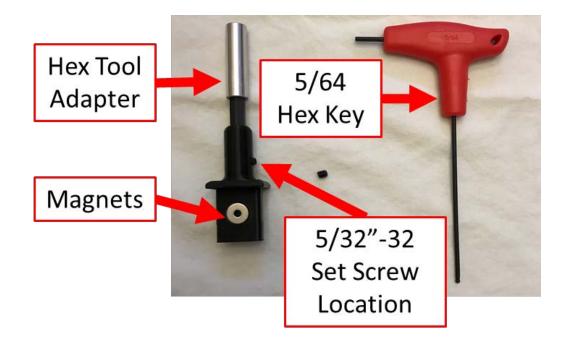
Parts and assembled quarter inch hex tool adapter activity insert.
